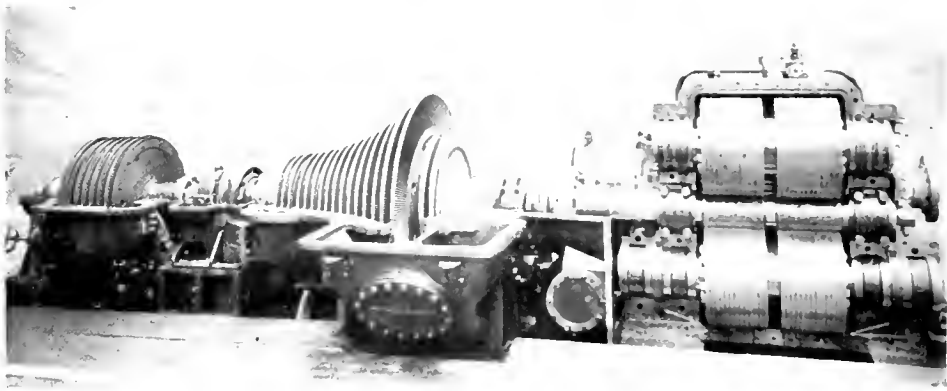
Destroyer Type Cruising and Main Turbines and Reduction Gear
